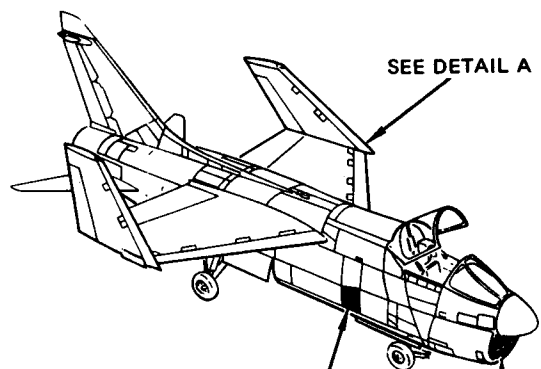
Ground Handling Safety Equipment (Sheet 1)
